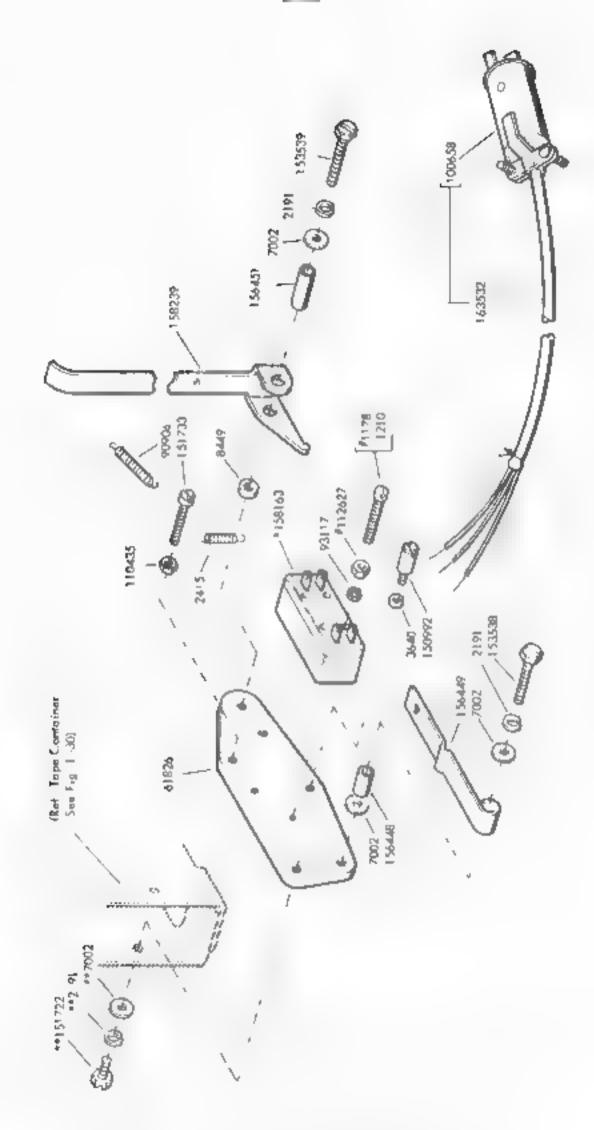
163531 TAPE-OUT SWITCH ASSEMBLY
